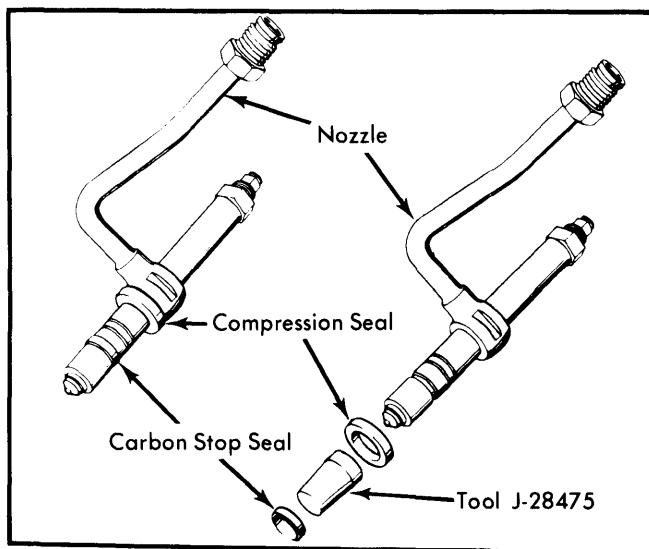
Roosa-Master Injection Nozzle Seals (Federal Models)
